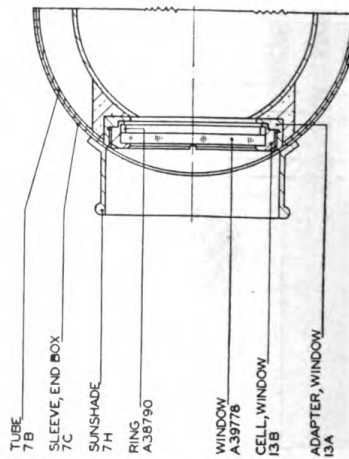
80-cm base range finder, M1918—sectioned views P-P to R-R.
